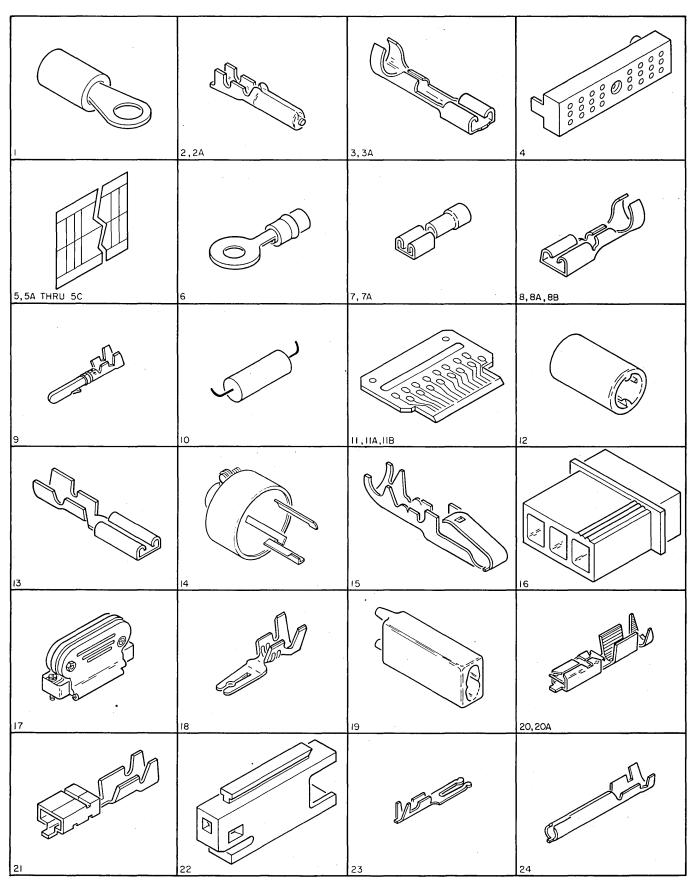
Cable Component Parts. Sheet 1 of 3. Index Nos. 1-24.
